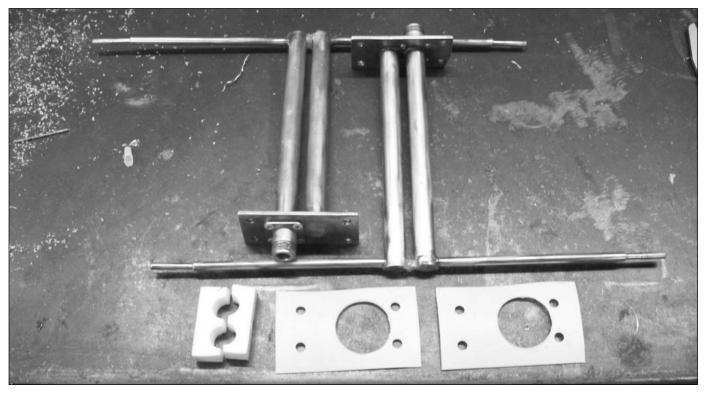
Two dipoles with PTFE insulation sheet and dielectric shorting stub (not used) prior to mounting on splash plate
